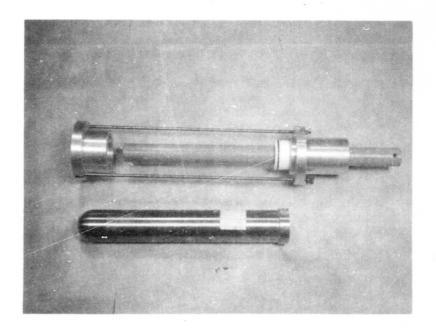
PHOTOGRAPH OF CASTING FIXTURES.
